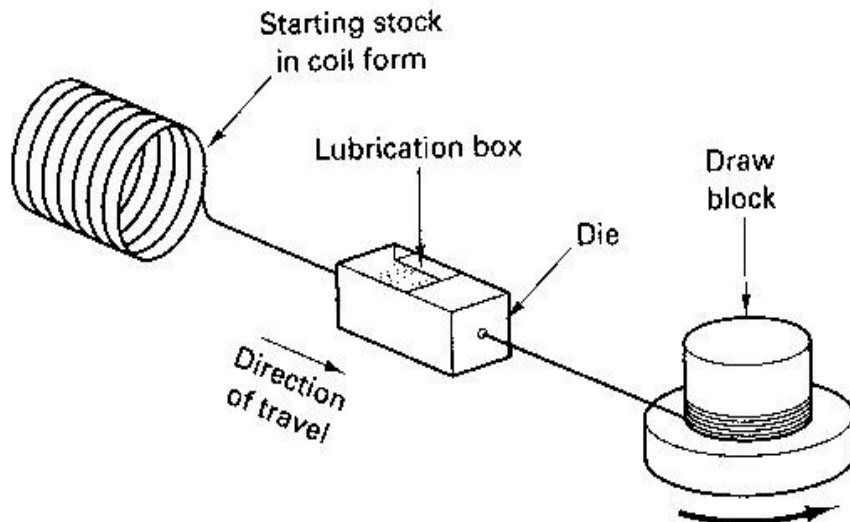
Schematic of wire drawing with a rotating draw block. The rotating motor on the draw block provides a continuous pull on the incoming wire.
